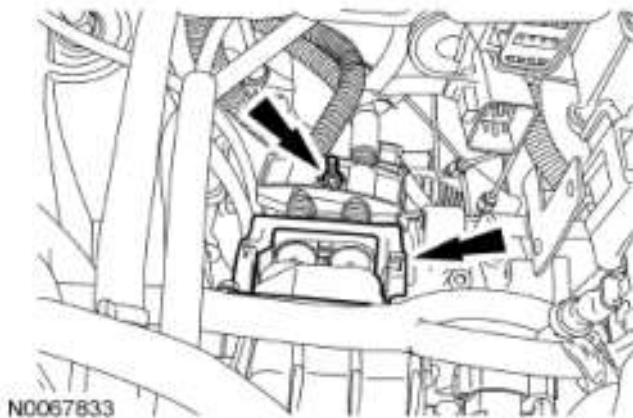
Locating Transaxle Harness Electrical Connector And Stud Bolt
